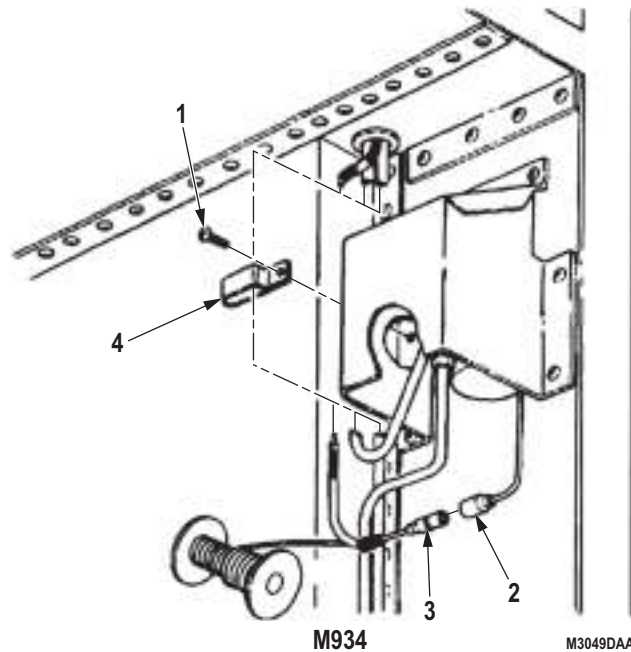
Heater Fuel Pump Wiring Harness Removal.
